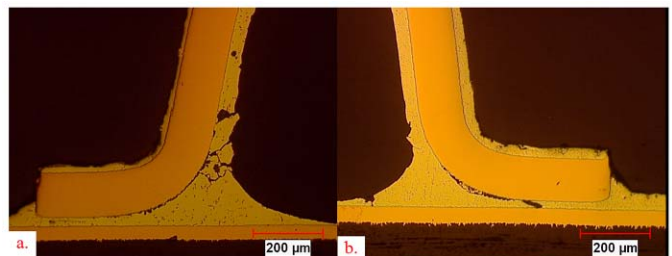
QFP176 fractures in a) Sunflower and b) Senju M42 after 1000 cycles Harsh testing
